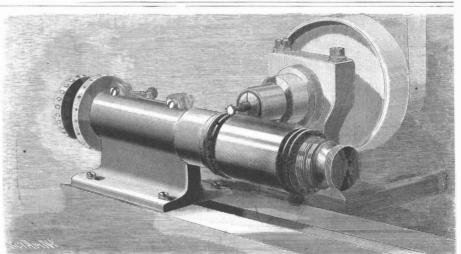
CUTTING SLOTS IN HUB FLANGES.
